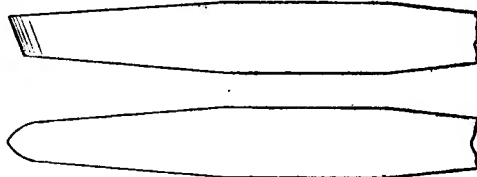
ROUGHING-OUT HAND TOOL FOR BRASS WORK.
